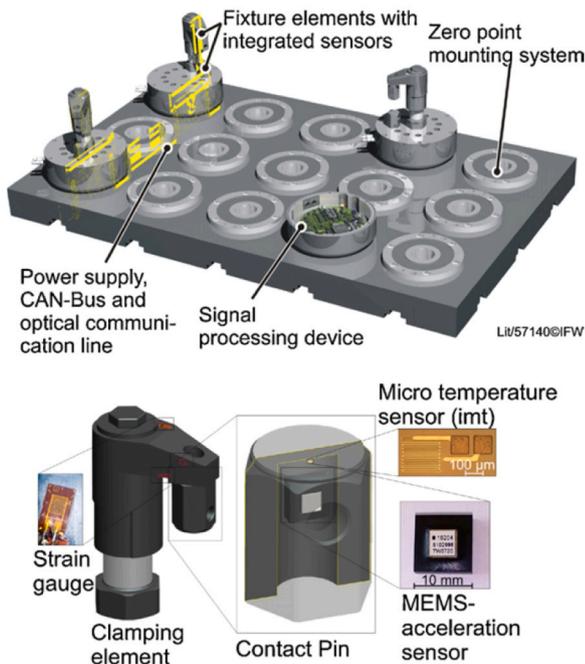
Sensory fixture with strain gauges and MEMS accelerometer integrated in the clamping element [180].
